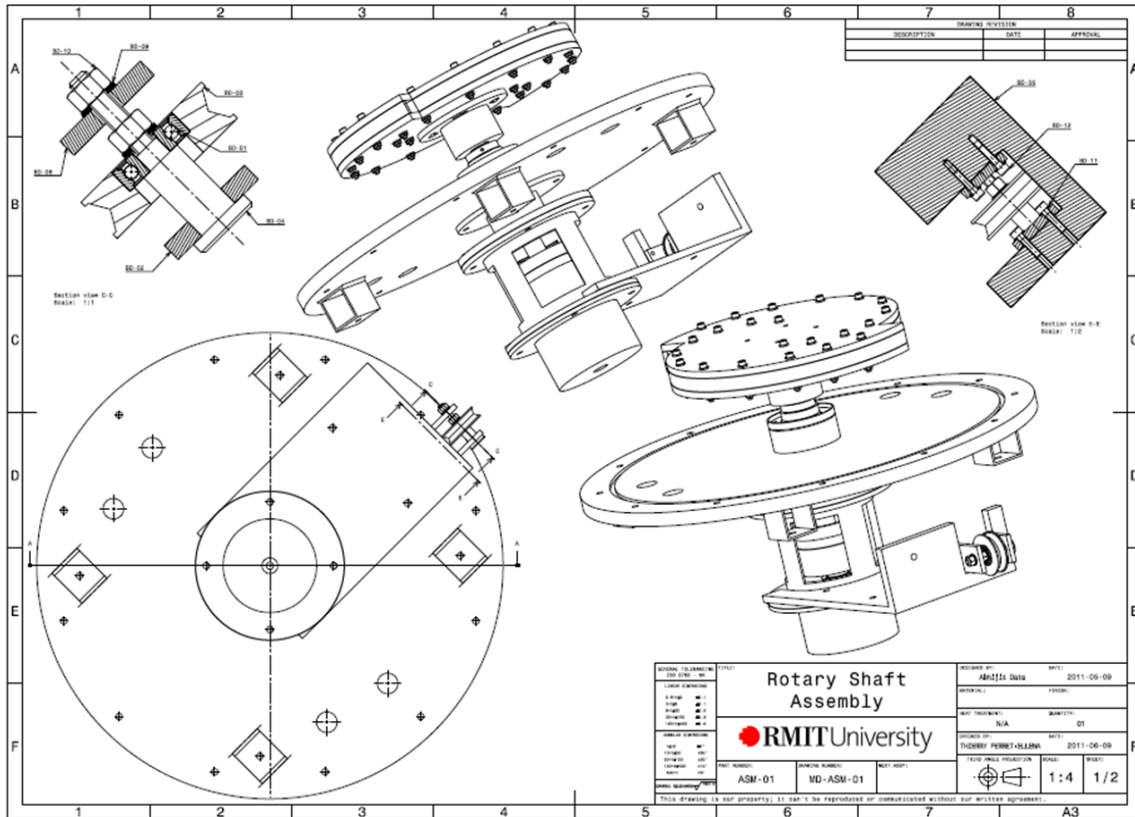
Assembly of the shaft and turbine in turbine housing
